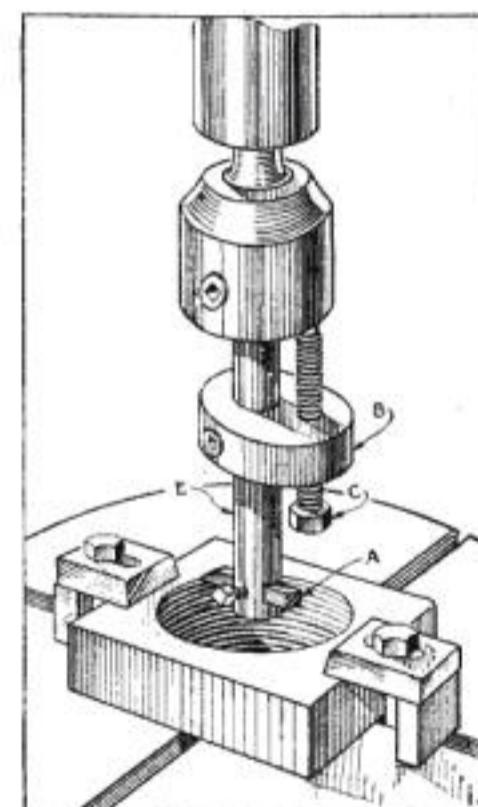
A plain boring tool fitted with a screw for fine adjustment.
